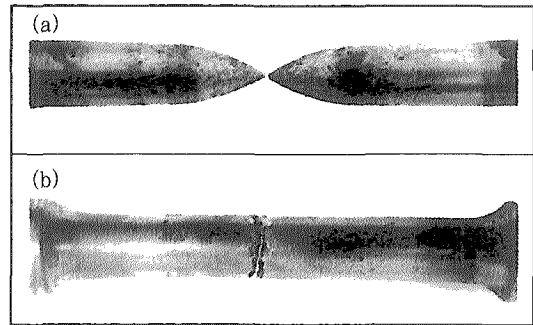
Macrophotographs of hot tensile tested specimens (a) fractured at 1380℃ and (b) fractured at 1400℃
